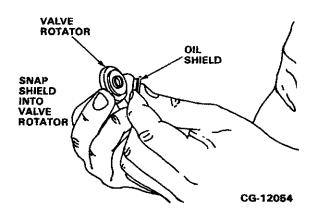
Assemble Rotator and Oil Shield (Used Prior to S/N 072707)
